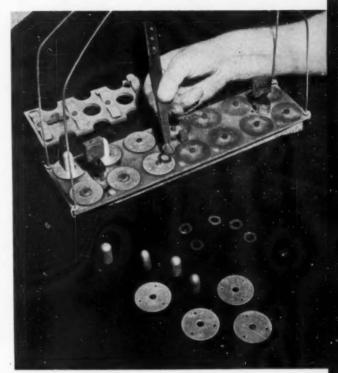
Typical fixture for small parts utilizing spring loading principle.
